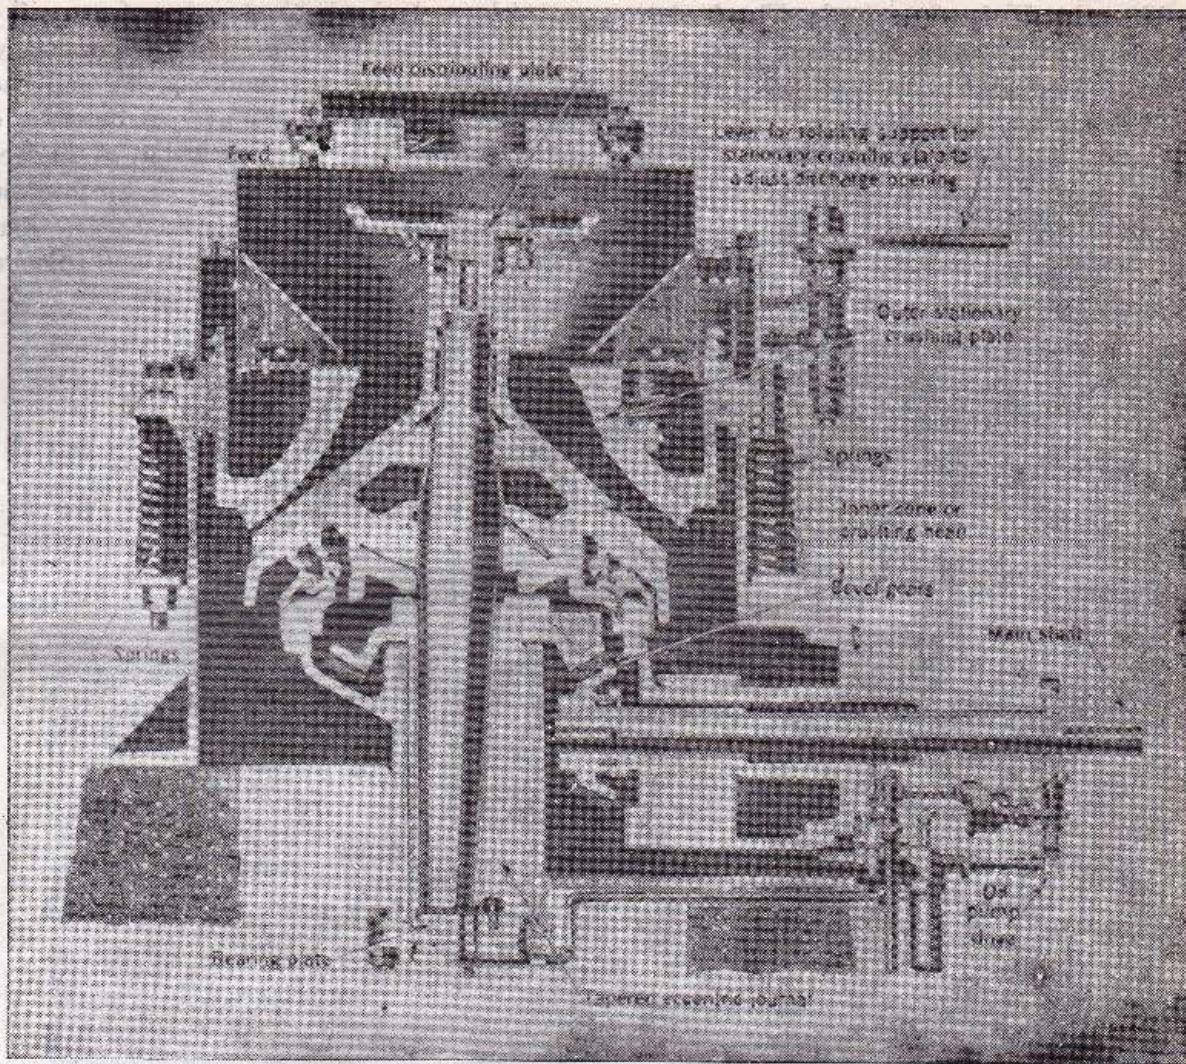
Sectional drawing of cone crusher. (*Nordberg Mfg. Co.*)
